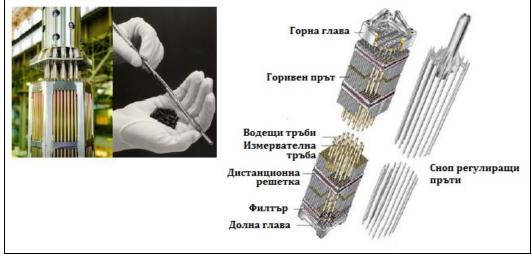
FUEL PELLET, FUEL ROD AND FUEL ASSEMBLY
